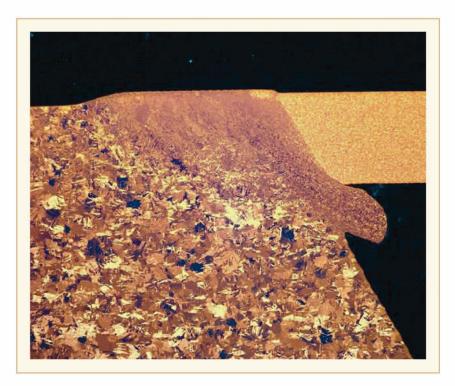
Transverse cross section of an Upset Shape Weld between the end plug and the fuel cladding, provided by the courtesy of AREVA NP.
